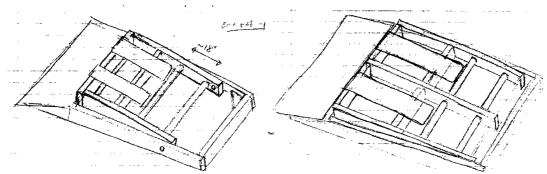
Mockup design drawings - two designs drawn of how a mockup prototype could be built out of 2x4s (with tilt function). The designs differ in the numbers of roller sets.
